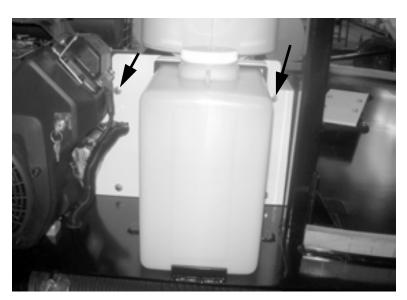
Remove the two top screws holding the priming tank bracket in place; then remove the bracket and tank.
